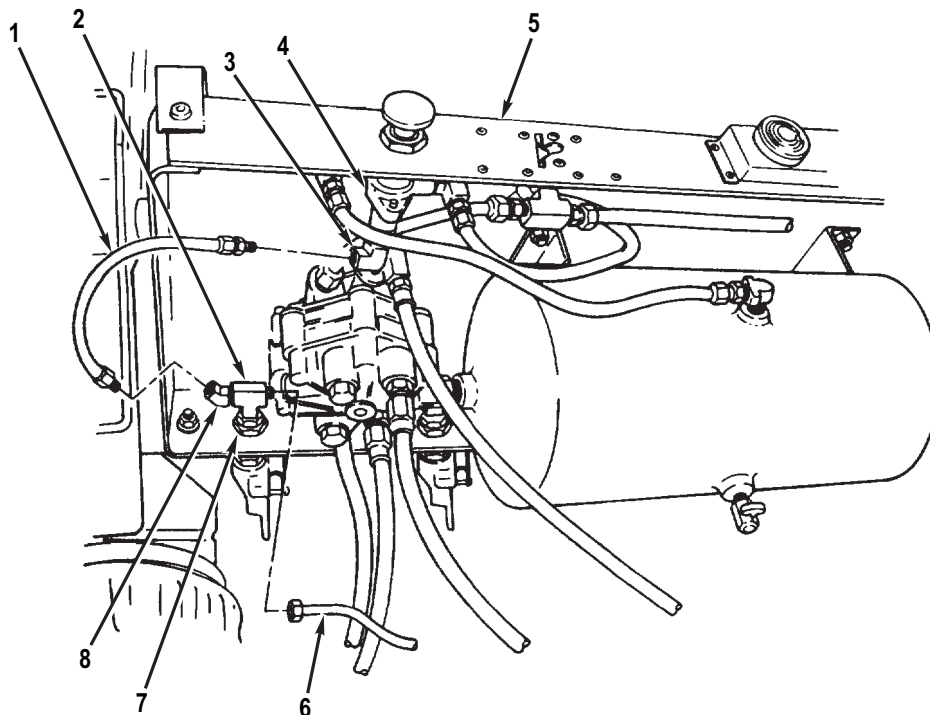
Airbrake Valve-to-Air Reservoir Tube Assembly Replacement.
